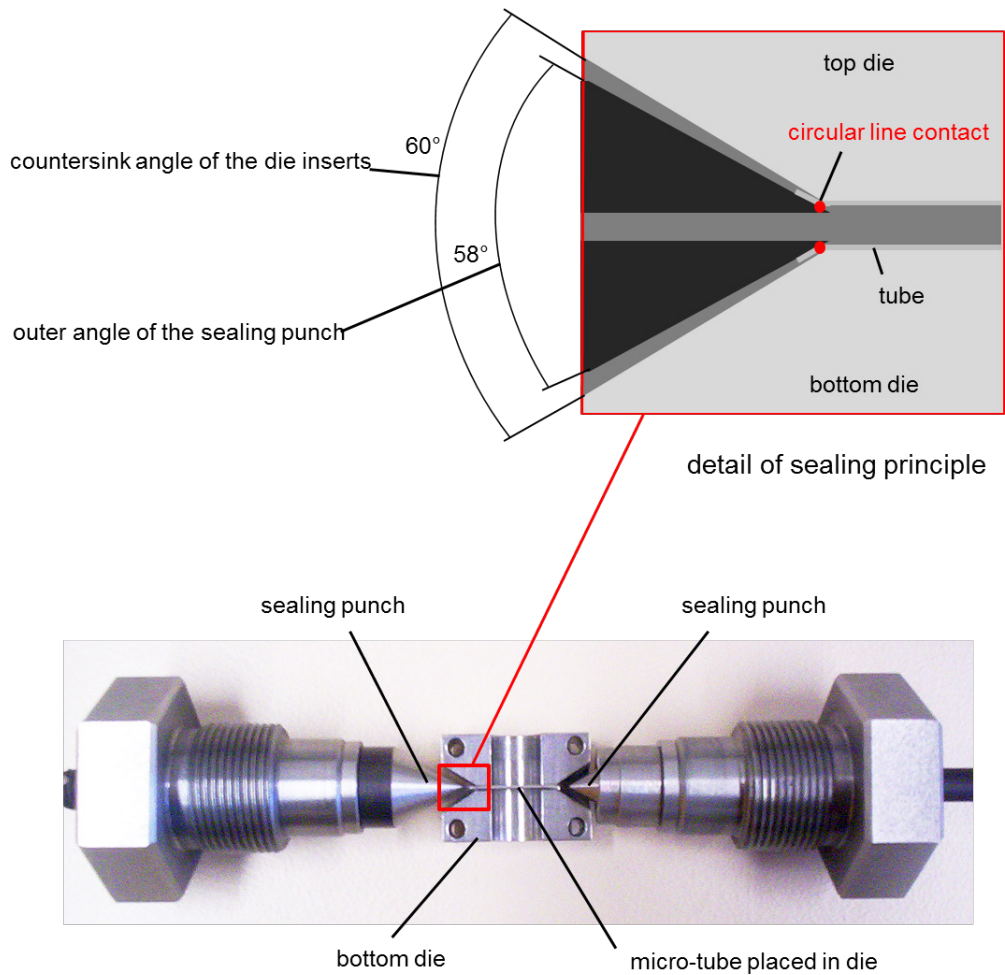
Sealing principle of the 58° sealing punch angle and 60° angle of the die inserts
